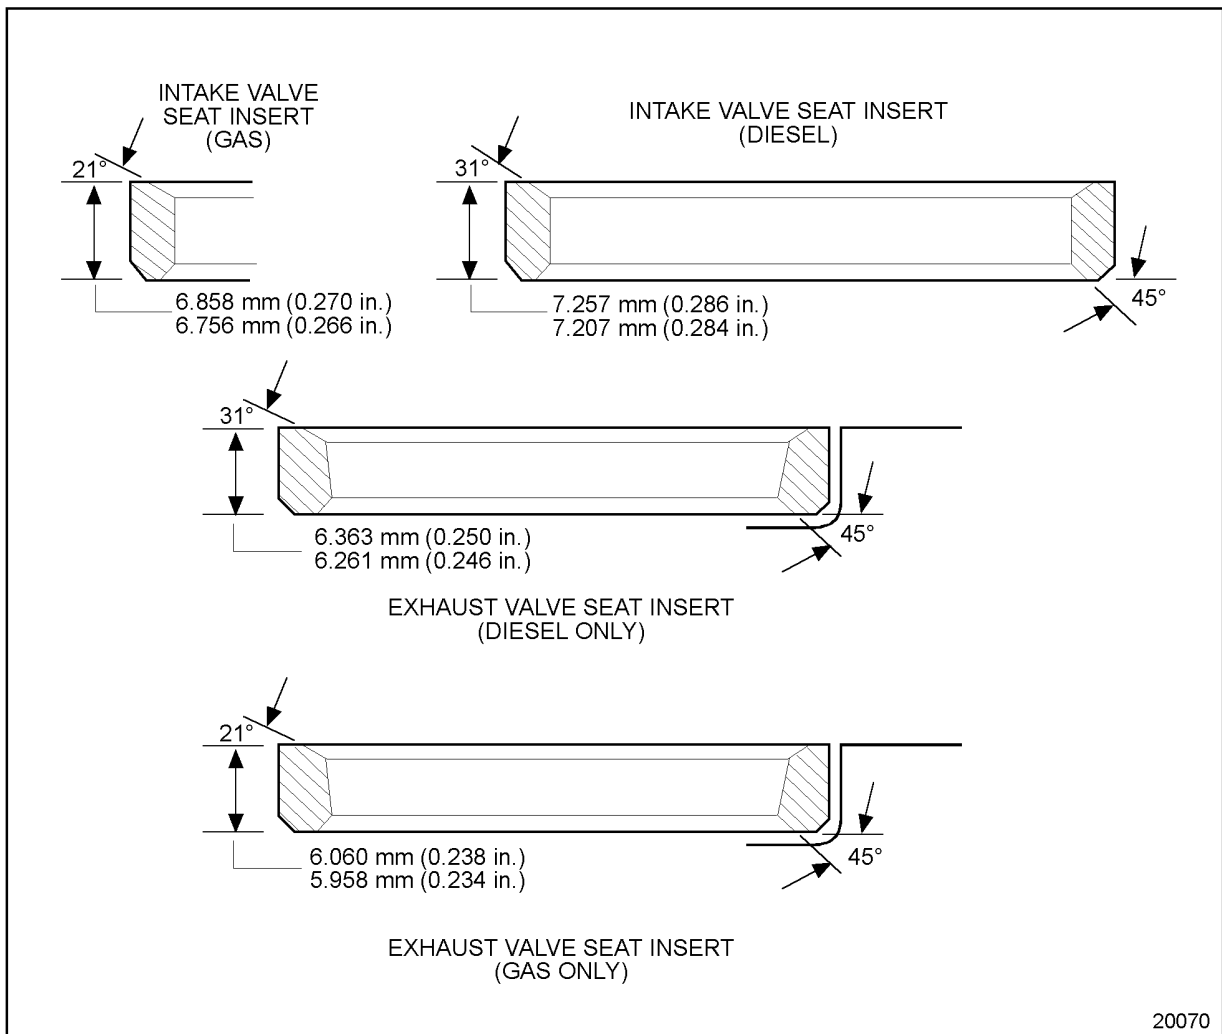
Standard Valve Seat Insert Thickness Series 50/50G
